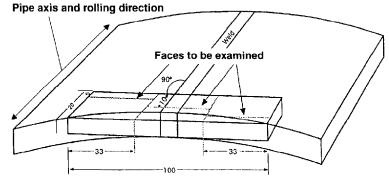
Seamless pipe and parent metal of longitudinally welded pipe (all dimensions in mm)
